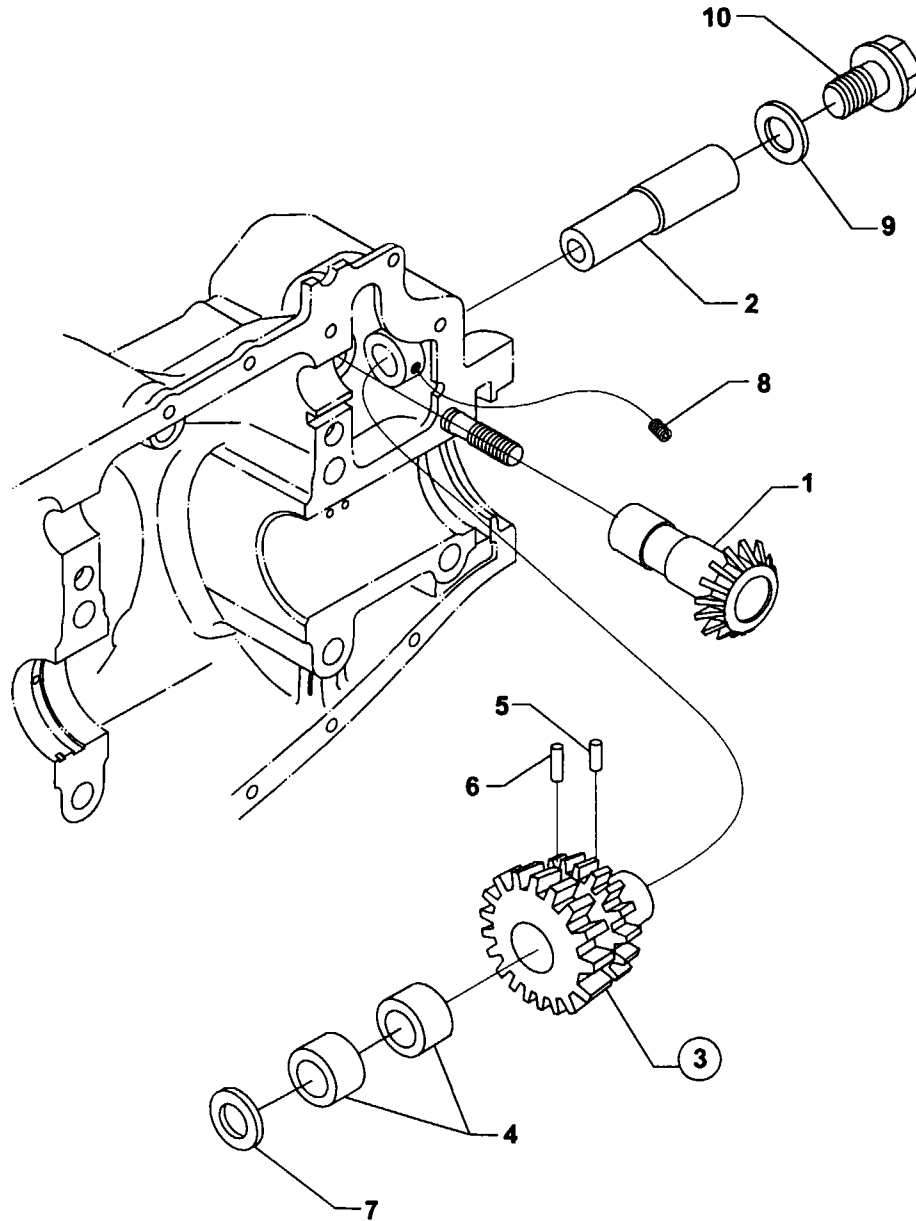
PROPELLER GOVERNOR DRIVE ASSEMBLY (CRANKCASE)
